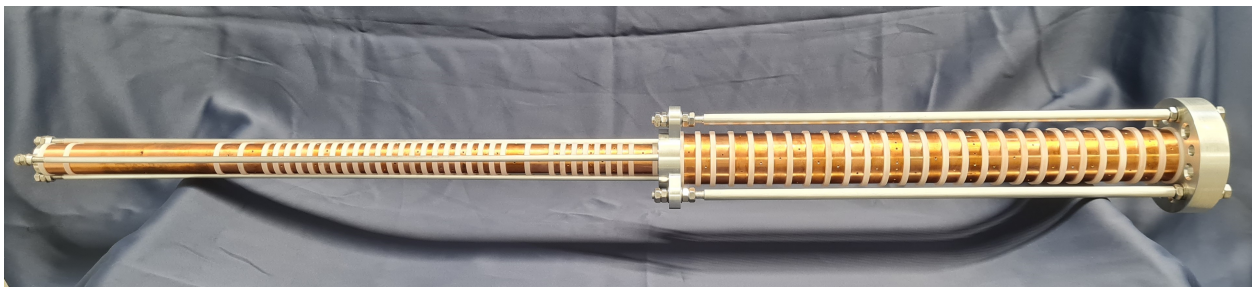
Full trap assembly for mechanical check before polishing and Ag and Au plating.
